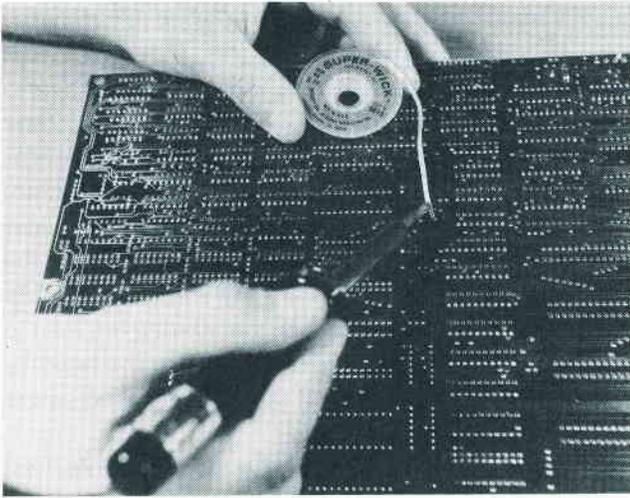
Use of a solder wick is another way to remove solder from a connection.
